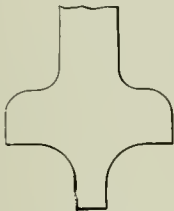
A Shaper Tool for Machining the Ends of Driving Box Brasses
